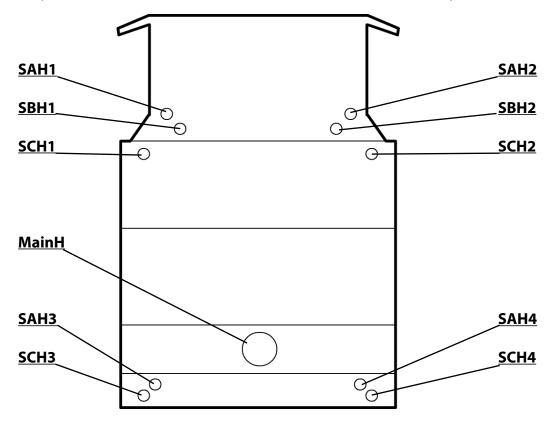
Metal Chasis Hole Labels (Overhead View)
